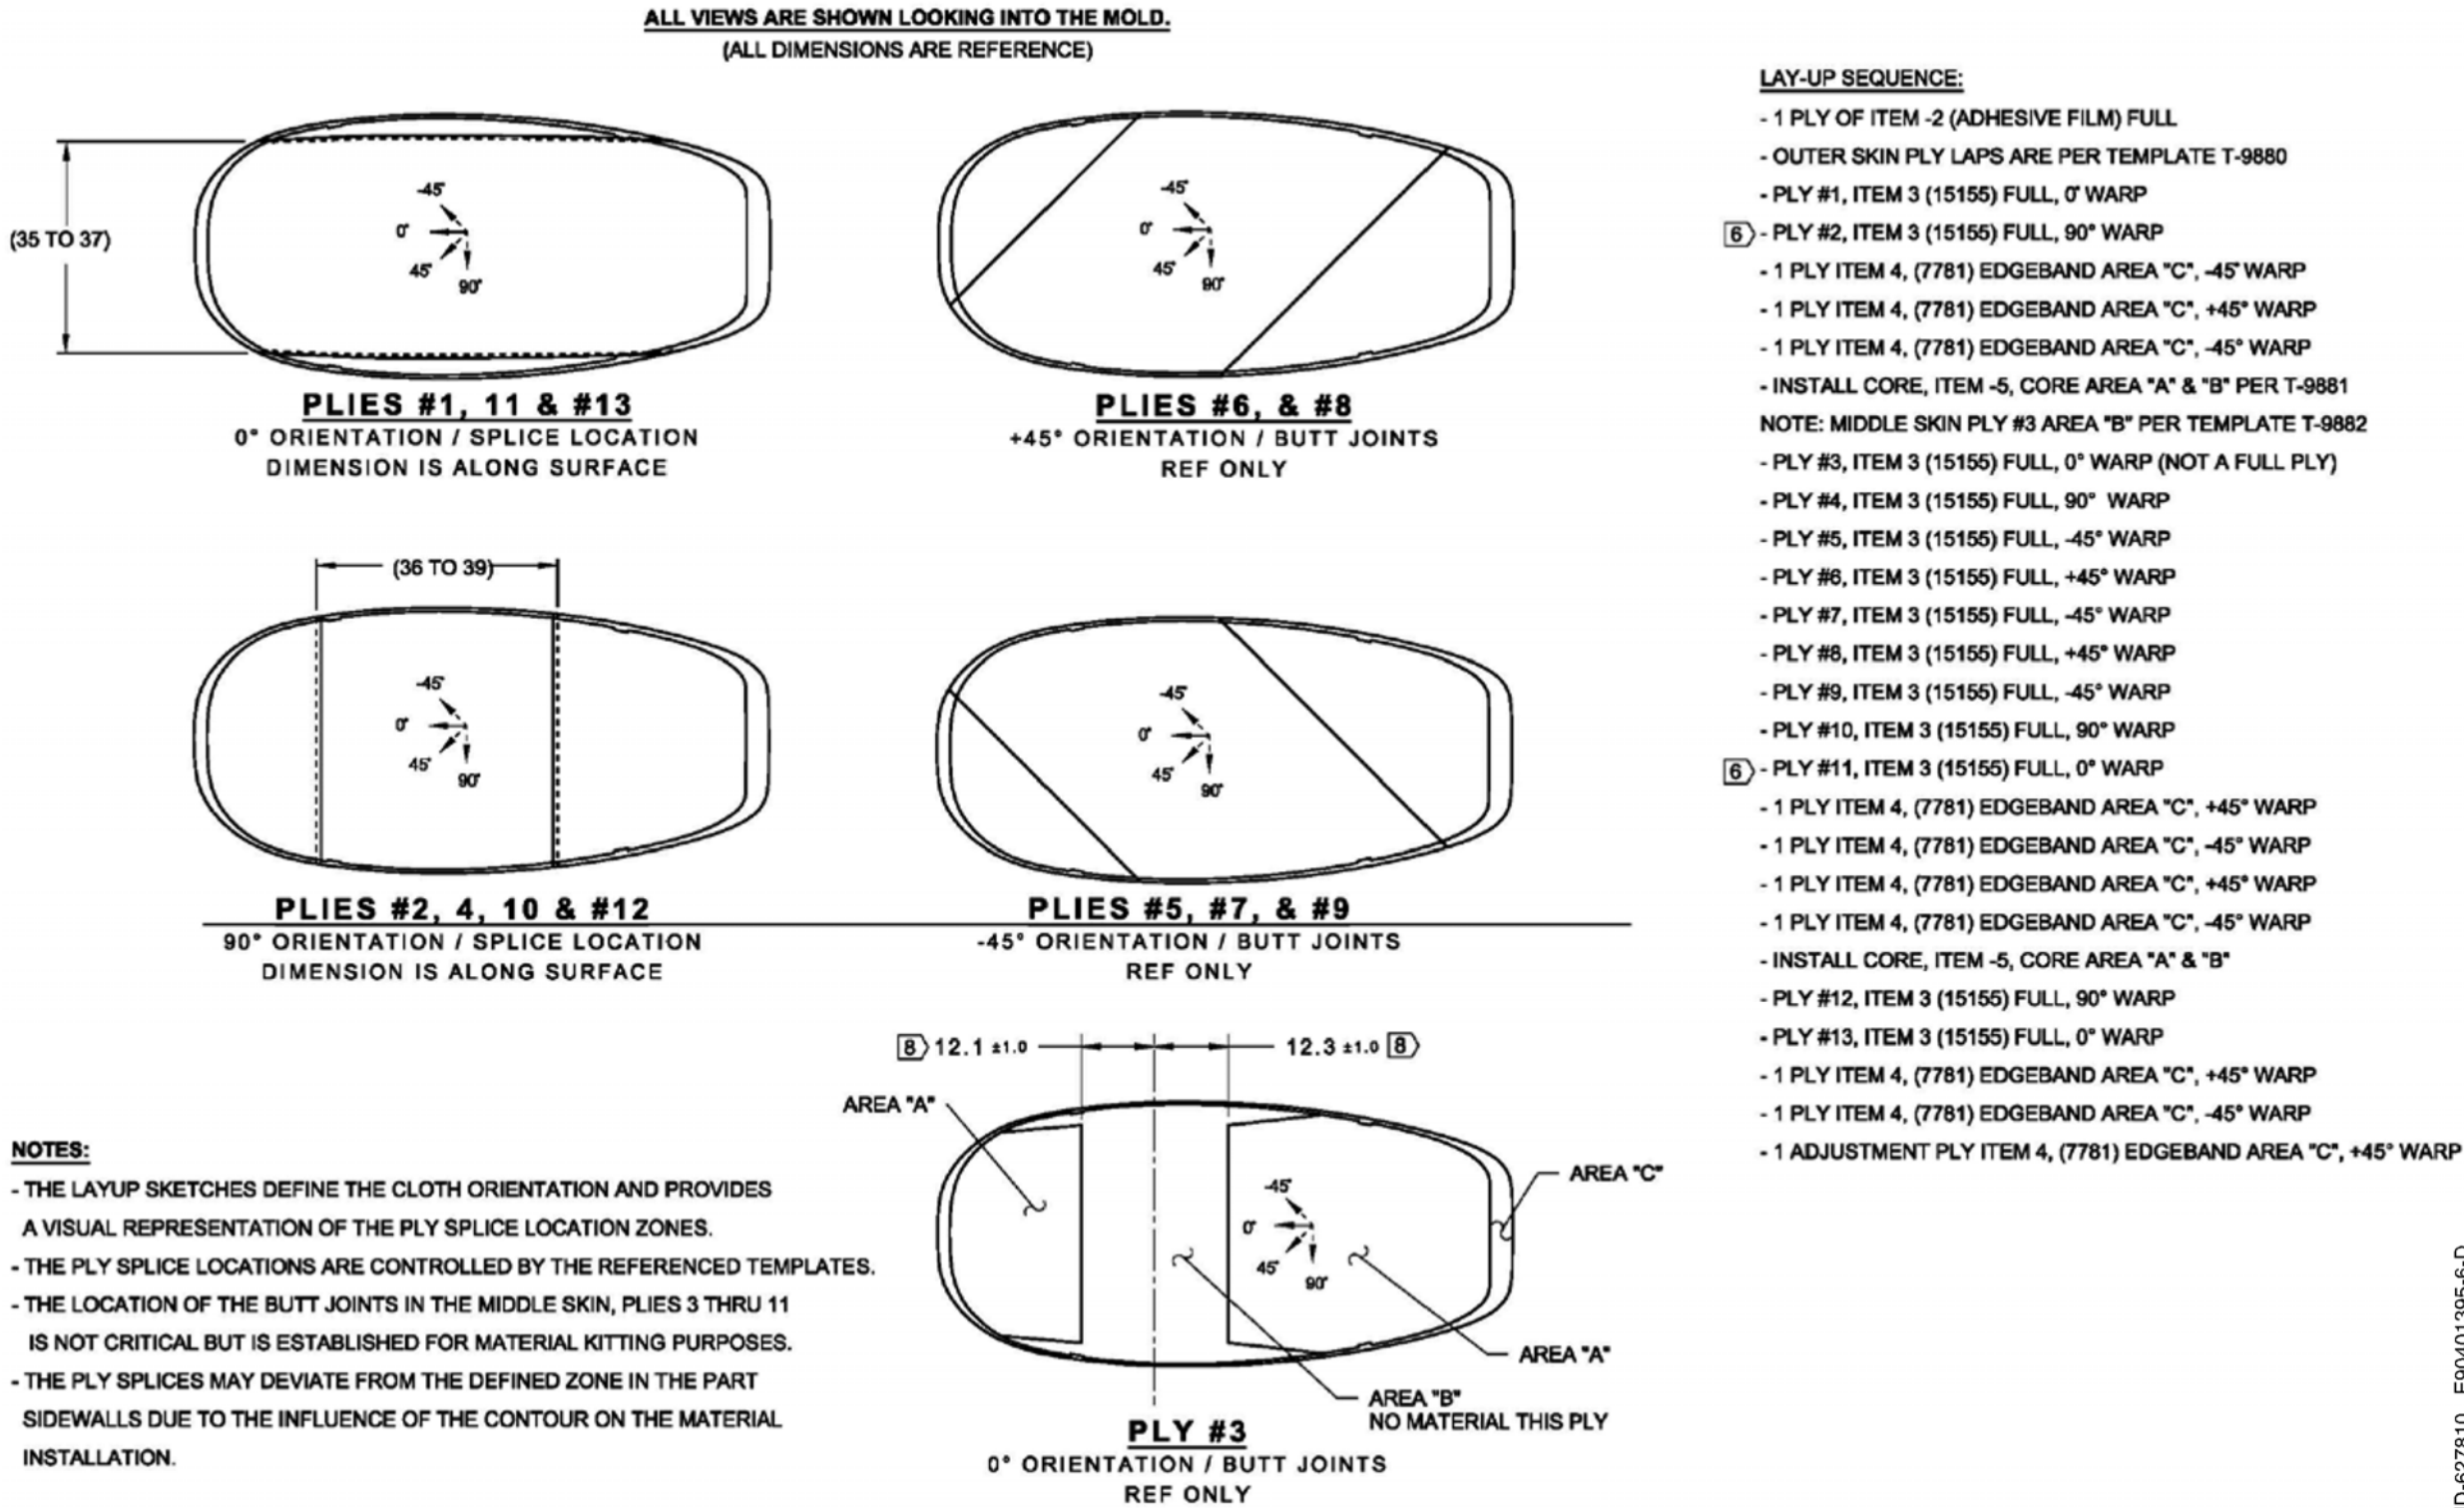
(Sheet 6 of 6) Fuselage Mount Radome Outline and Installation Drawing (90401395, REV D)
